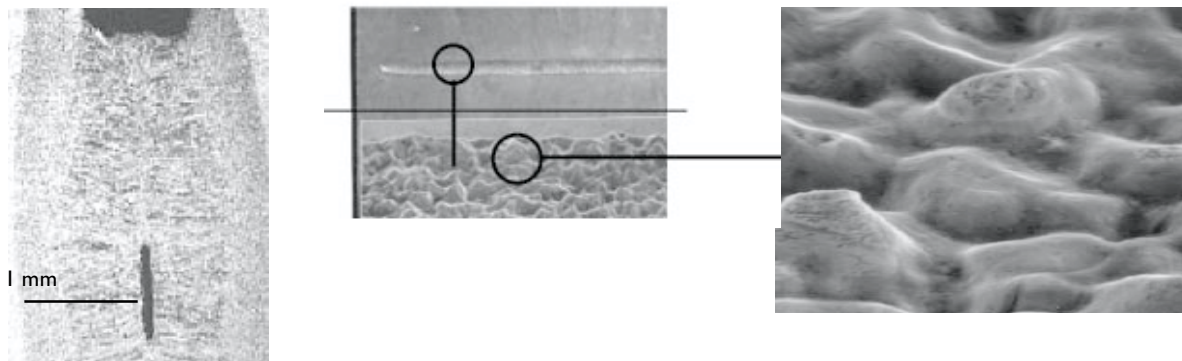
a.) Solidification flaw in laser welded cold forming steel; b.) SEM picture of the surface in the solidification flaw (upper part 40x, lower part 400x), c.) detail of surface from picture in 6b 2000x.
